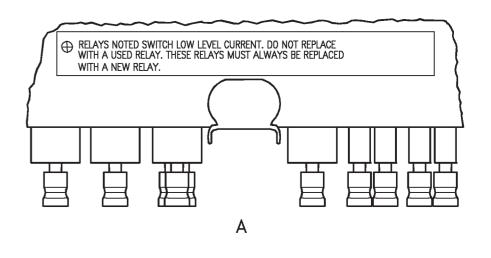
No. 3 Relay Panel Assembly - 52A-E059 (Sheet 1)
